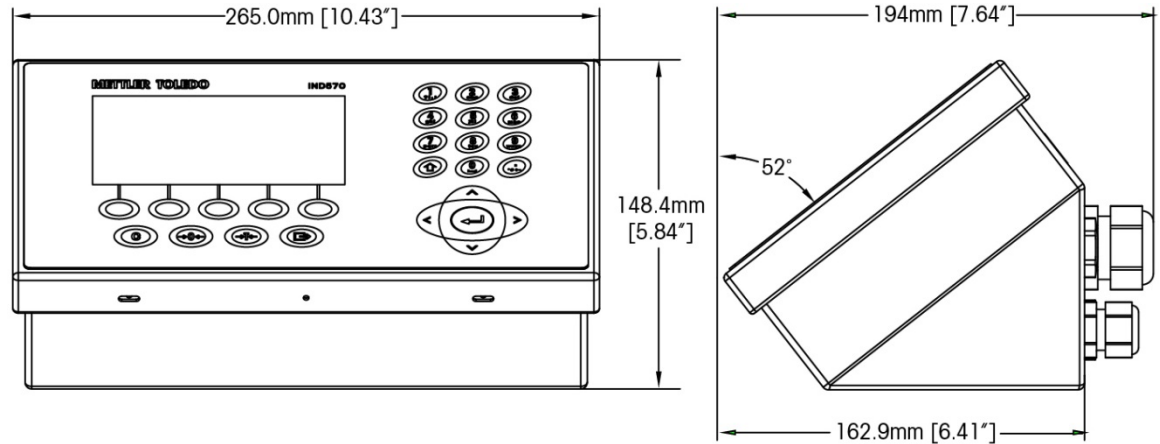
IND570 Harsh Environment Enclosure Dimensions
